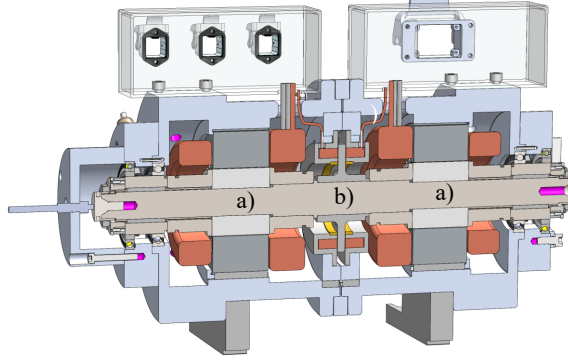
Example of a bearingless rotor system. a) Bearingless motor unit and b) axial magnetic bearing.
